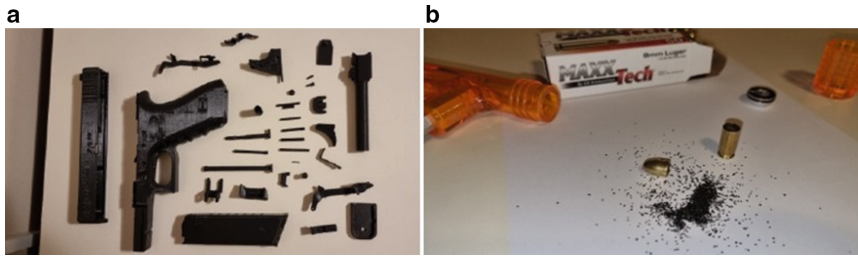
a) 3D printed Glock 17, b) disassembled 9 mm bullet.
